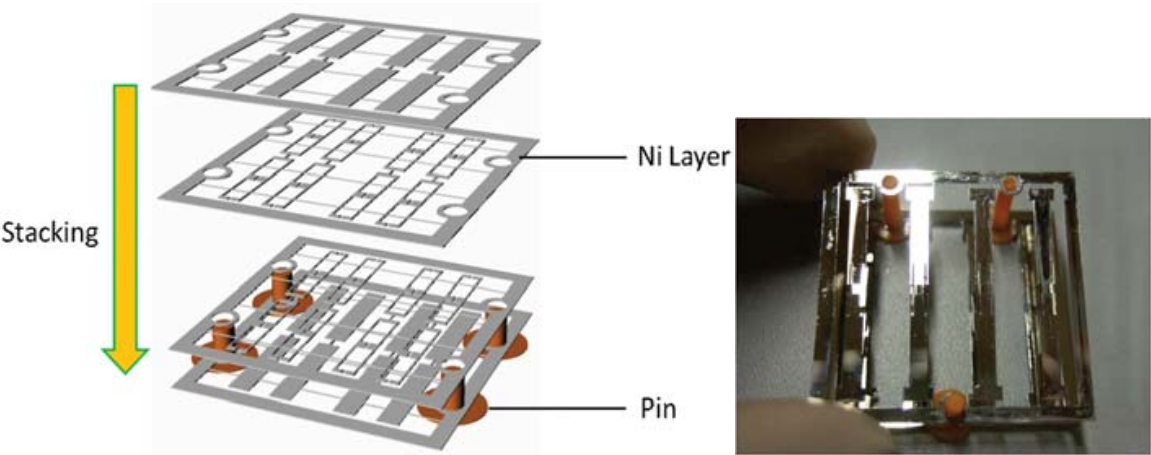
Fabrication method of base links using STAMP (Stacked Micro-assembly Process)
